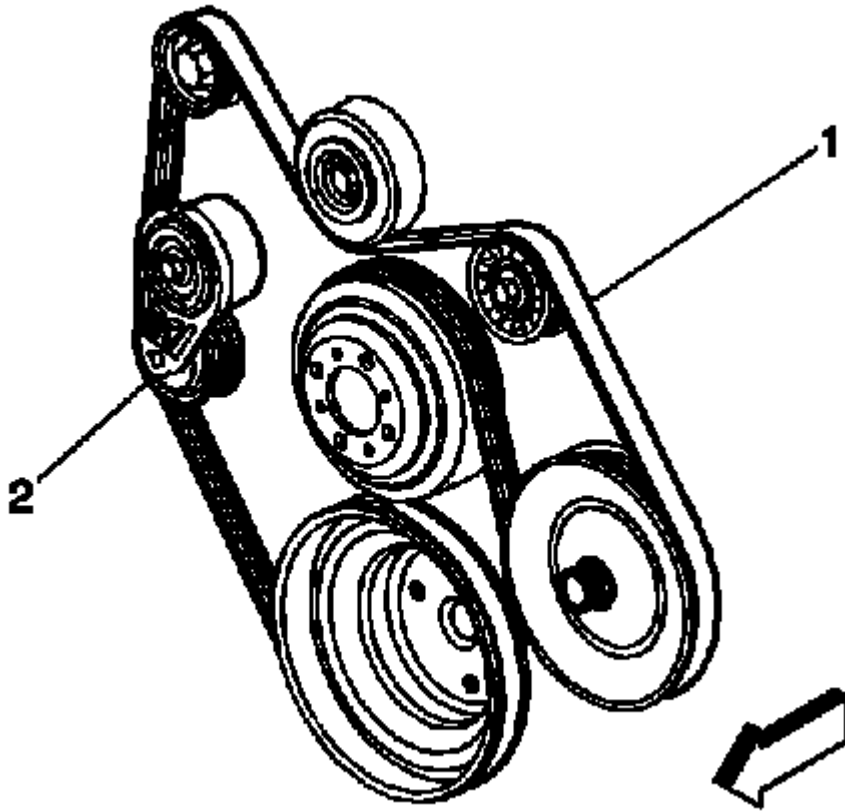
Drive Belt Routing And Tensioner (W/O A/C
